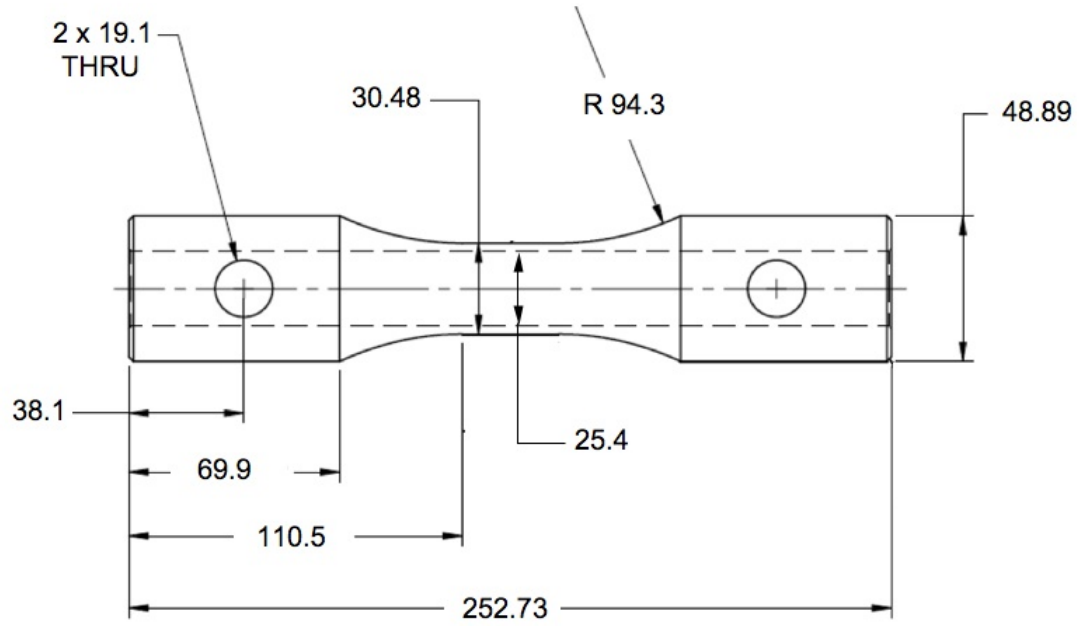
Drawing of thin-walled tubular specimen design (dimensions in mm).
